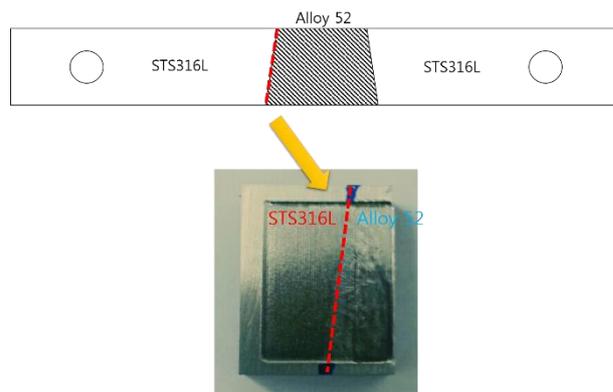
Alloy 52 welded STS316L specimen
